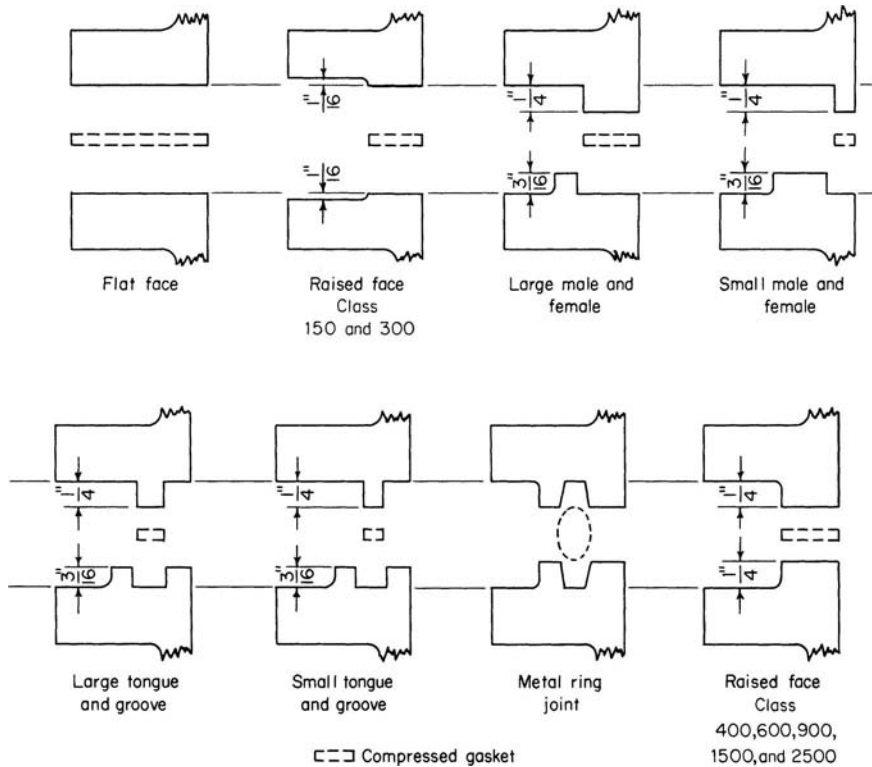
Flange facings, illustrated on welding-neck flanges. (On small male-and-female facings the outside diameter of the male face is less than the outside diameter of the pipe, so this facing does not apply to screwed or slip-on flanges. A similar joint can be made with screwed flanges and threaded pipe by projecting the pipe through one flange and recessing it in the other. However, pipe thicker than Schedule 40 is required to avoid crushing gaskets.) To convert inches to millimeters, multiply by 25.4.
